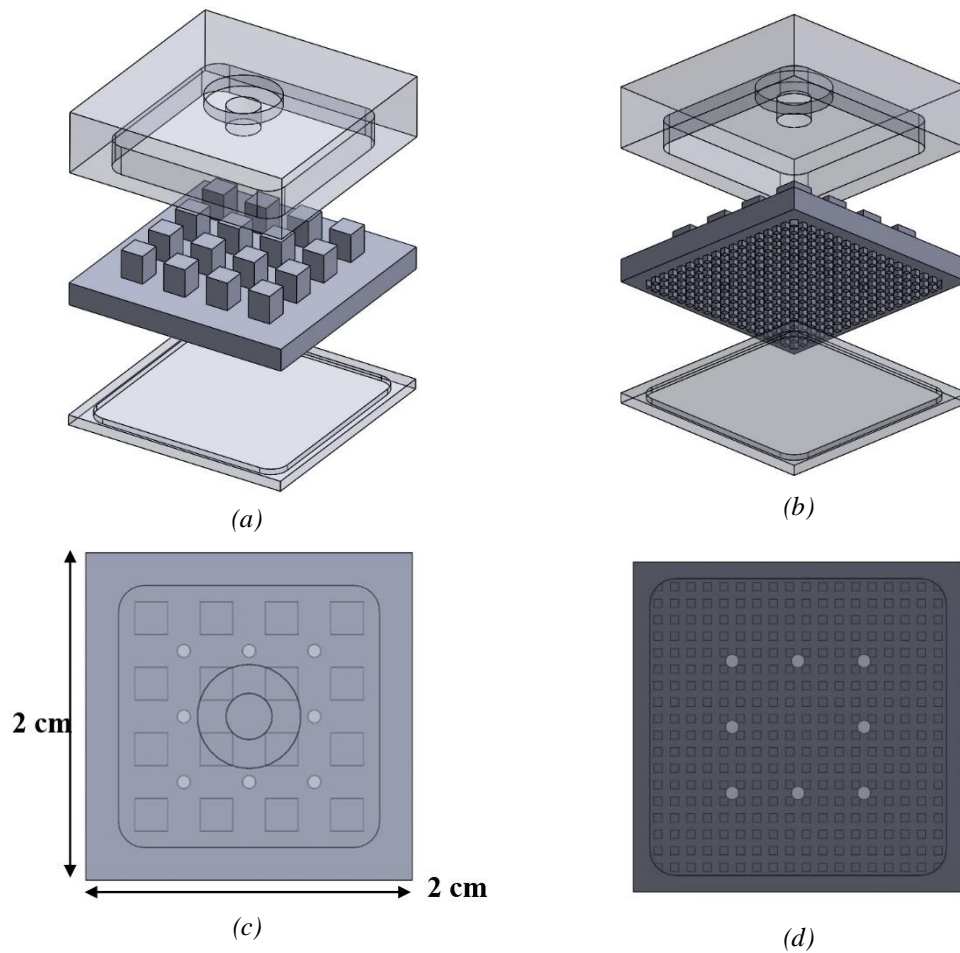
(a-b) Exploded views of the test sections sent out for fabrication. (c) Top view of the assembly showing the plenum section of the test article indicating the larger support pin structures that are widely spaced. (d) Bottom view of the assembly showing the microscale pin fin section with smaller pins that are closely spaced.
